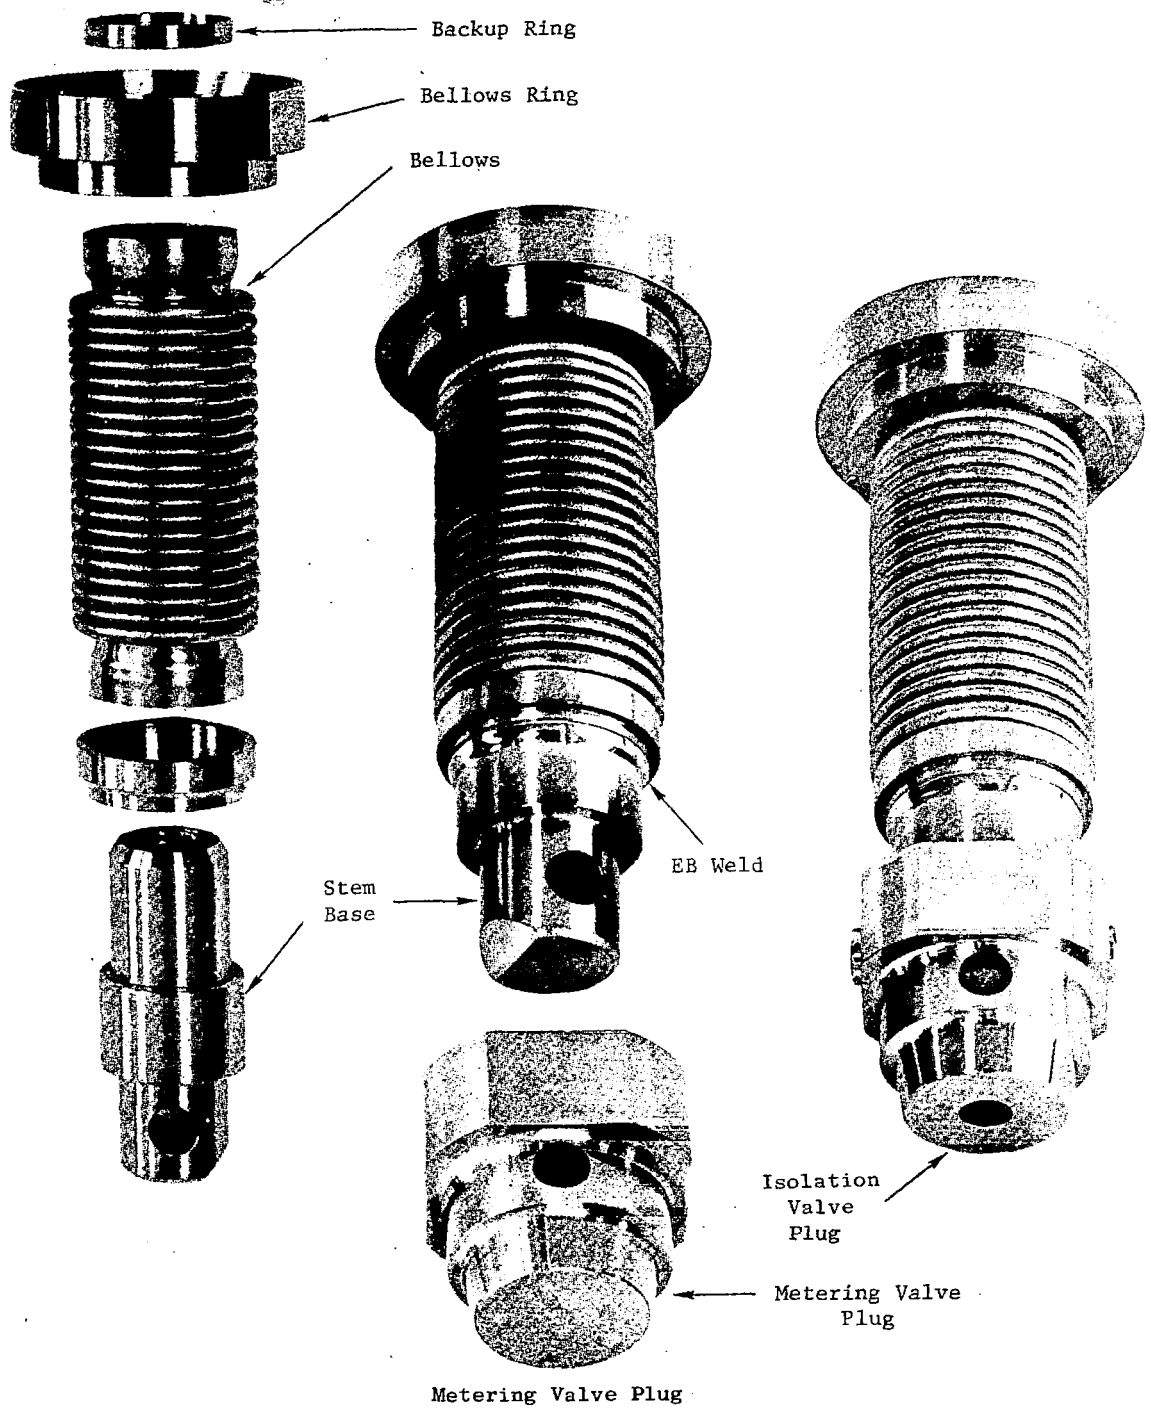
Valve Plug, Stem Base and Bellows Assembly.
